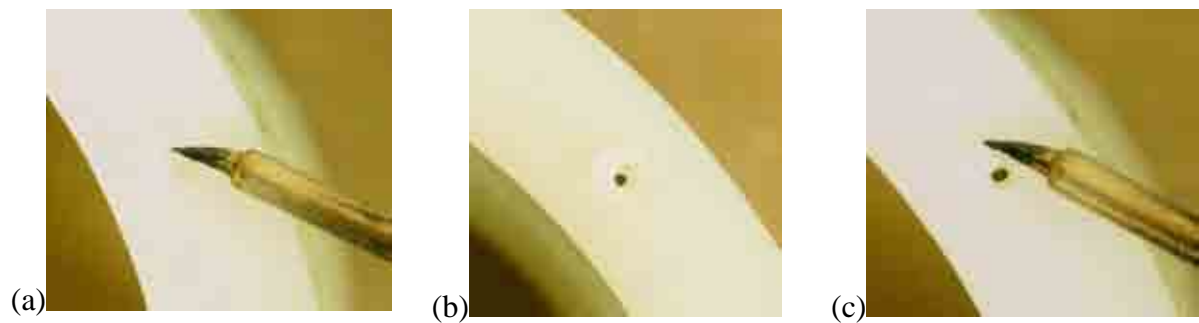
(a) Making the hole with a soldering iron, (b) chip inserted into the hole, polymer from the hole on the surface, and (c) refilling the hole with molten polymer from the surface.
